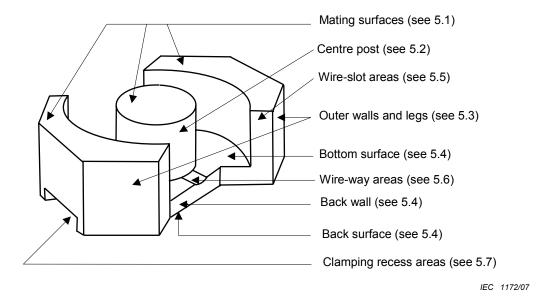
Location of main core parts and surfaces – Example of RM-core type
